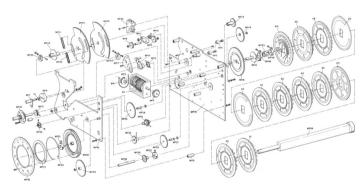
Mechanical Band and Tuning Linkage, Exploded View
